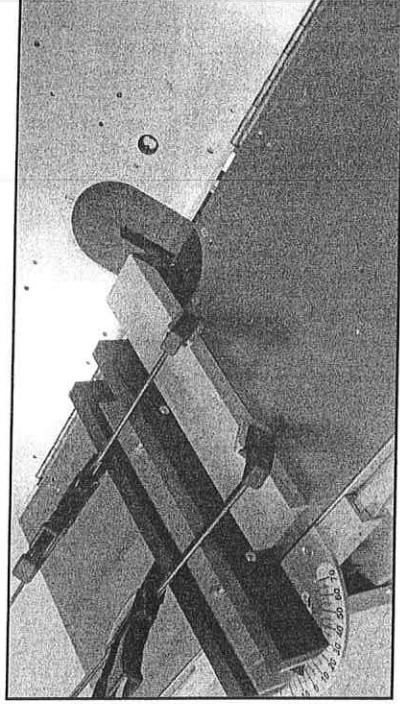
The socket cut is made moving the workpiece from left to right.
